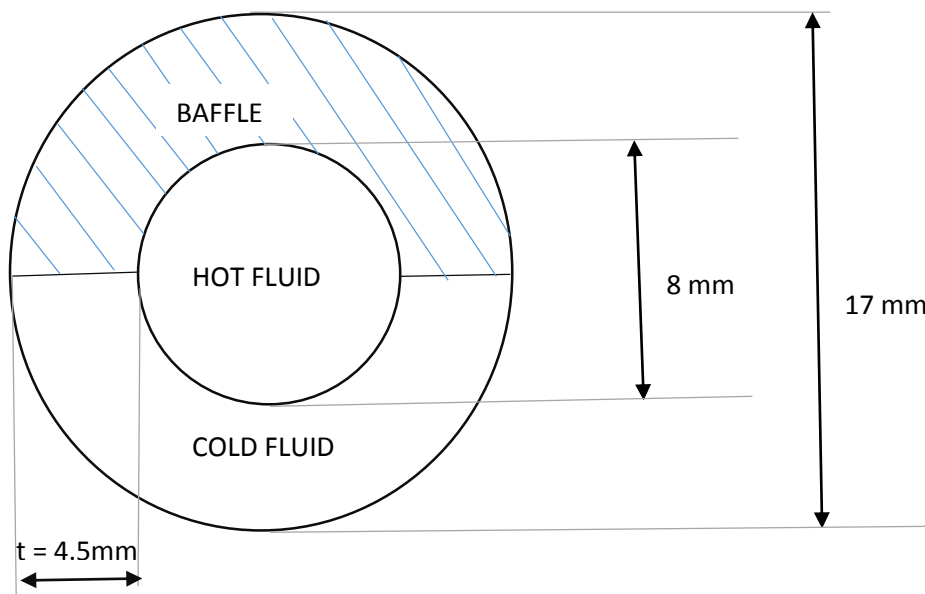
Cross section of helical coil tube in tube heat exchanger at the baffle
